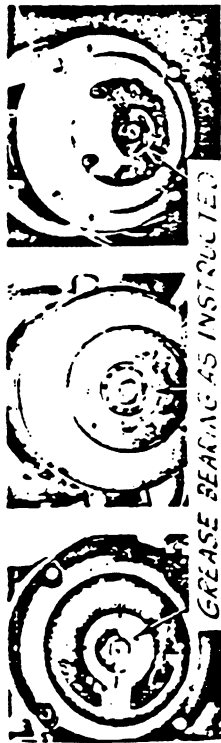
SERVICING THE GENERATOR BEARINGS
